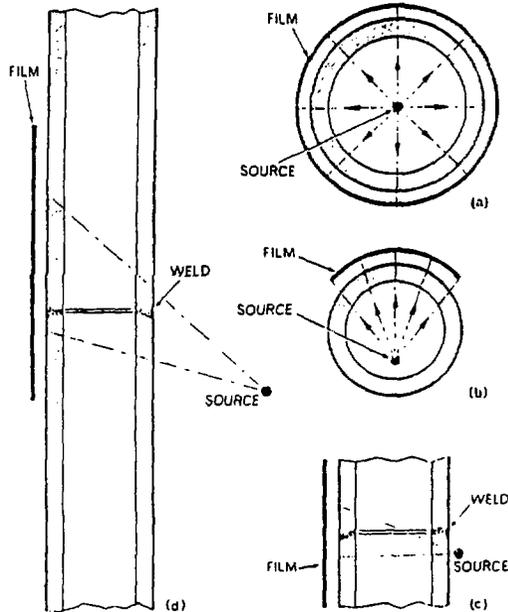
Techniques in gamma radiography of pipe welds
